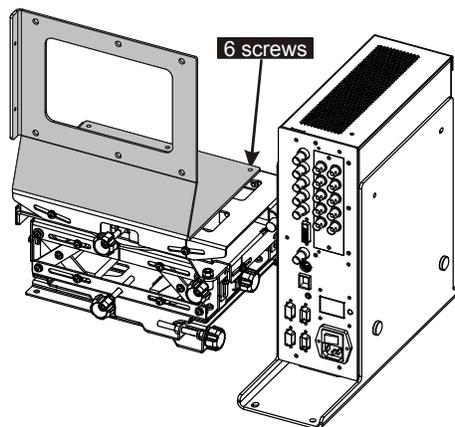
INSTALL CONFIGURATION BRACKET TO ADJUSTER BASE
